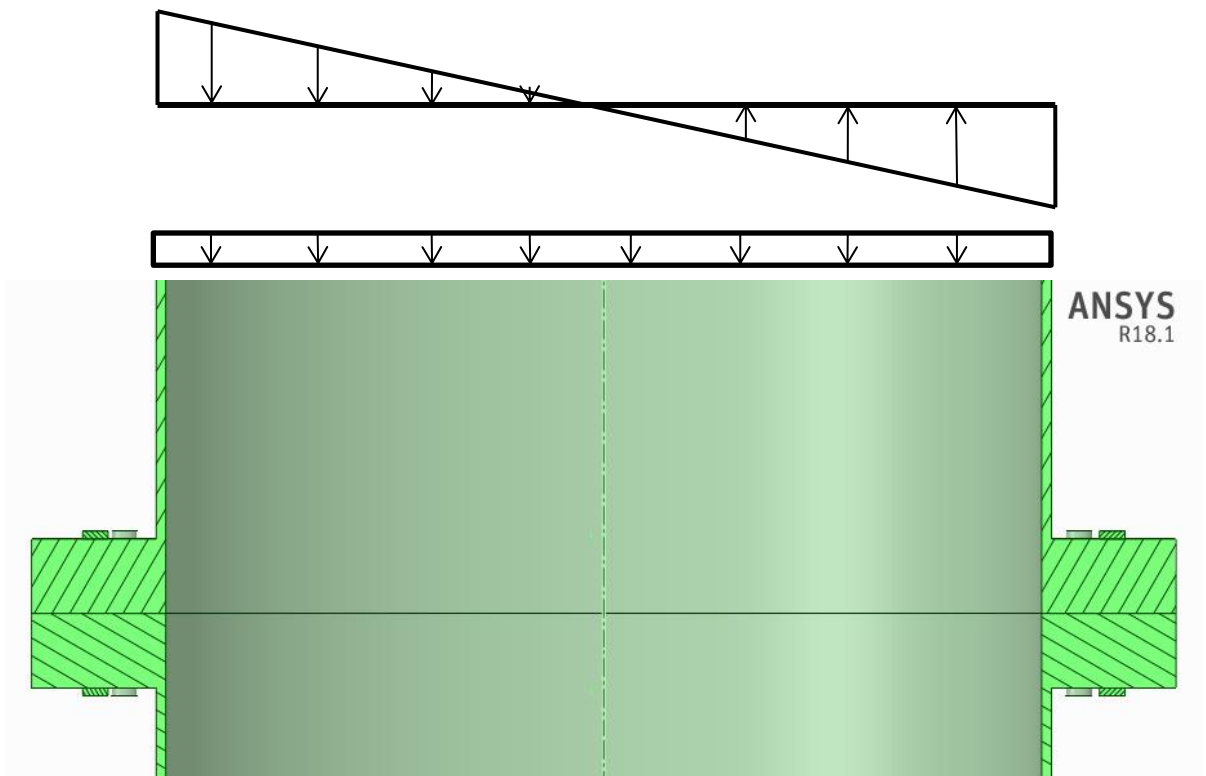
Dynamically Loaded Bolted Flange Connection
